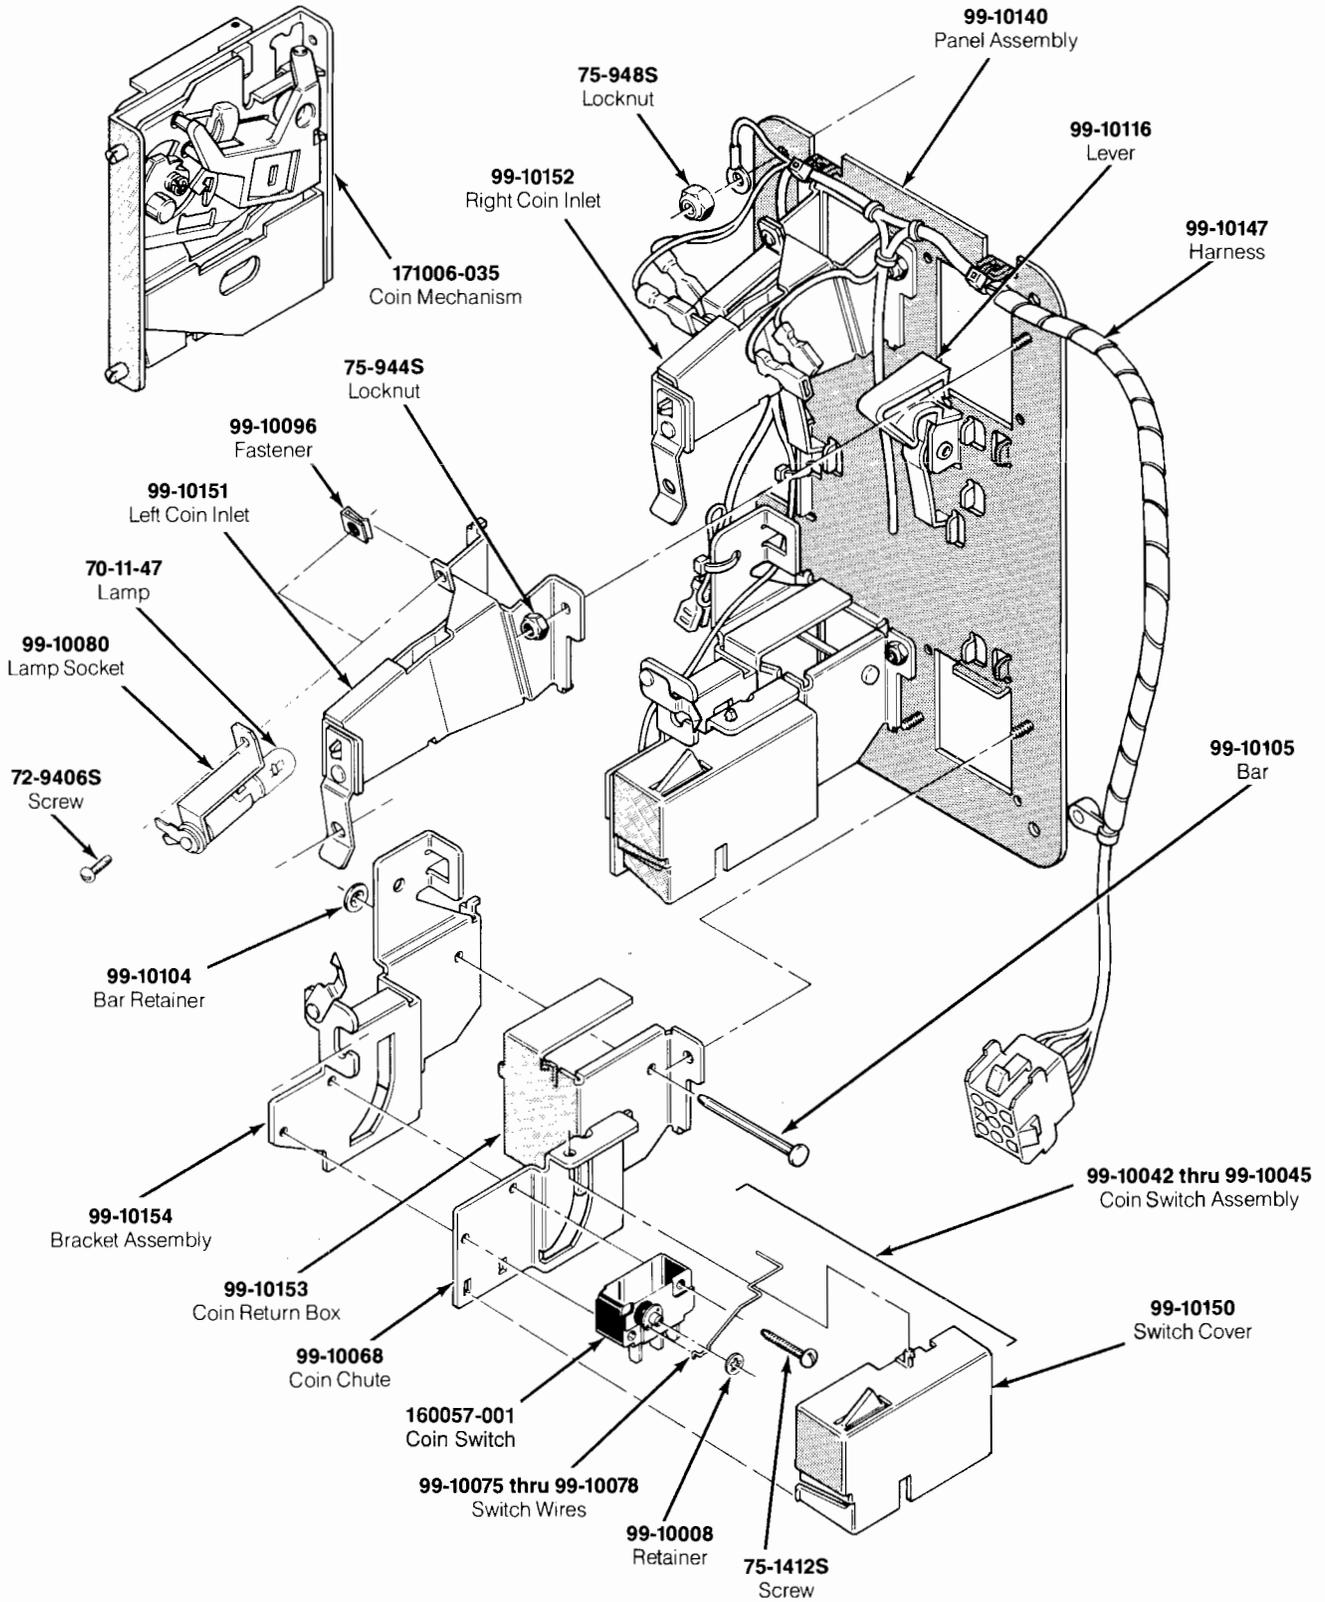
Coin Acceptors, Inc. Coin Door Assembly
